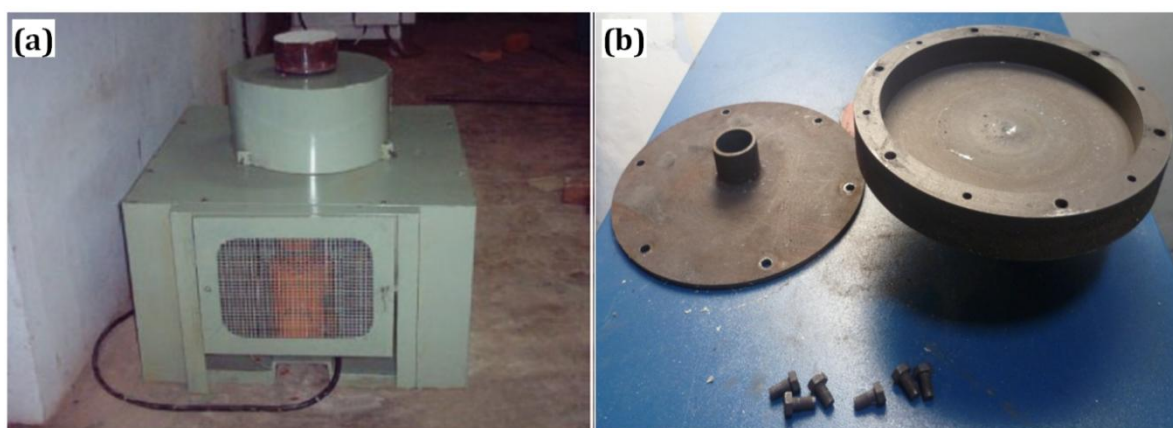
(a) Vertical centrifugal casting machine and (b) Mould for FGM rings
